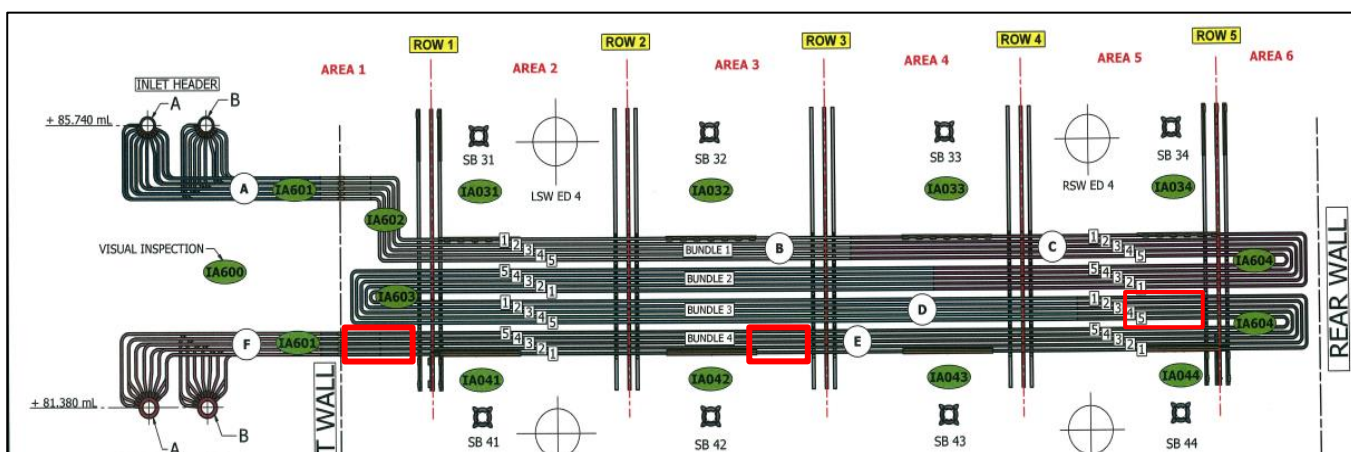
Schematic drawing of SH2 Area 1 Bundle 4 Tube 1 (leading tube) showing where Tube-SOLO inspections should be conducted.
